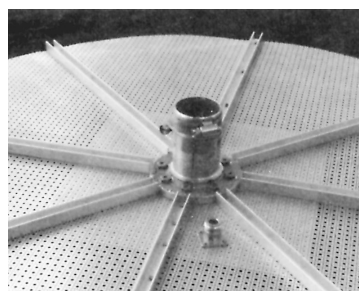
The method of reinforcing the reflector screen with aluminum channel stock. In this version of the antenna, the three angle brackets of Fig 51 have been replaced with a surplus aluminum flange assembly. (W0CY photo)
